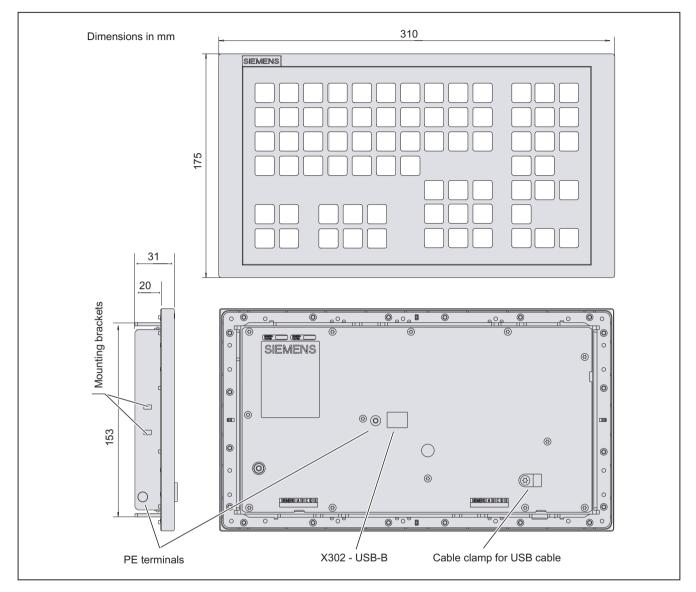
Front, side and rear views of CNC full keyboard KB 310C
